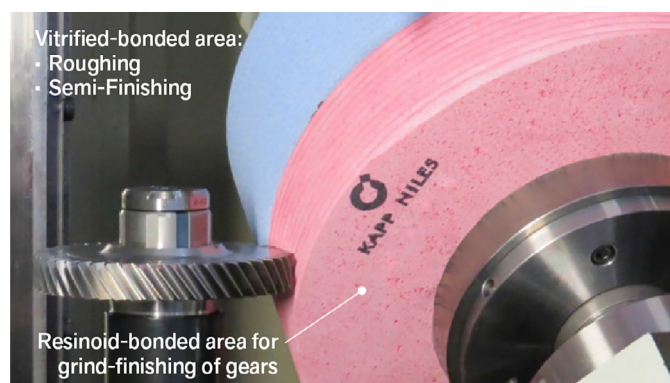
Grind-finishing of gears (KAPP NILES GmbH & Co. KG).
